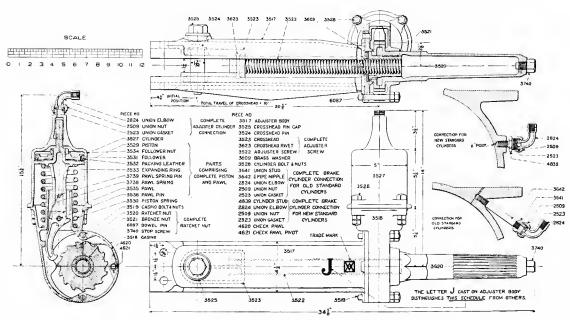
American Automatic Slack Adjuster. American Brake Company.
